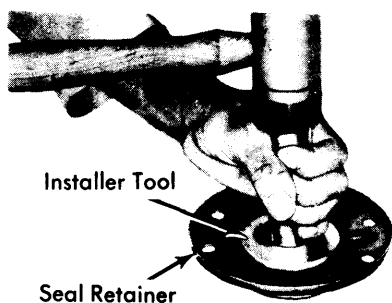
Correct Procedure to Install Pinion Oil Seal
